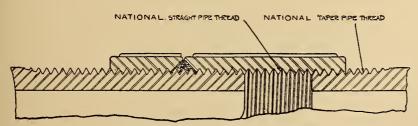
Illustration of "long screw" joint between straight threaded coupling and taper threaded pipe
